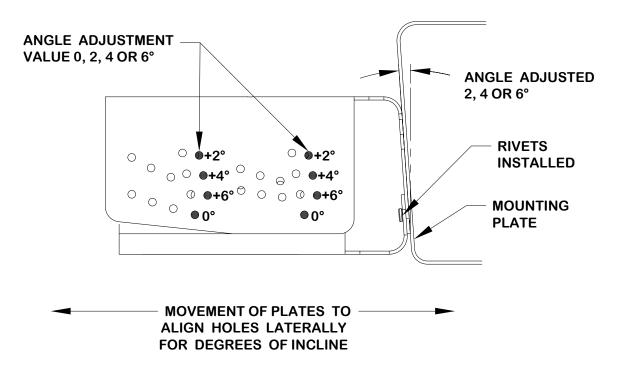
GMU 44 Universal Mount Hole Alignment, Lateral Method (Side Plate Mounted)
